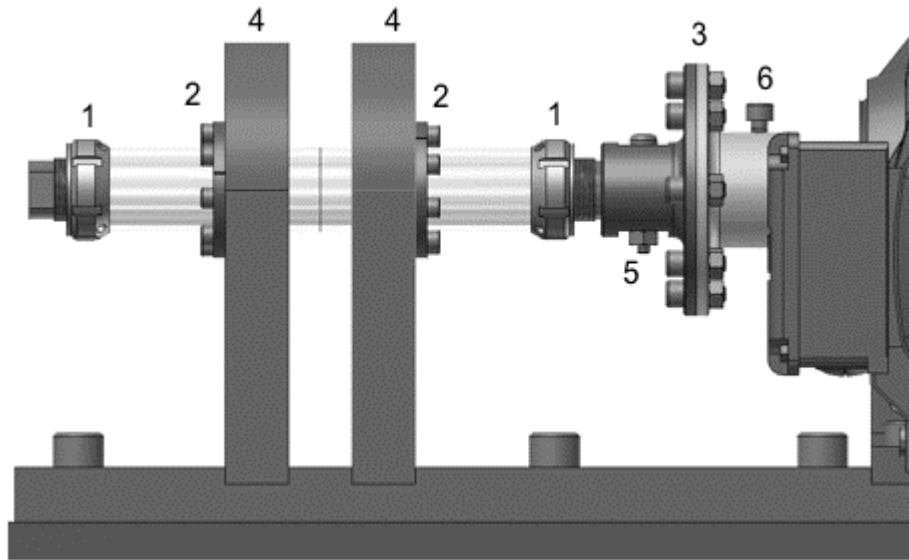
Schematic diagram showing the various components in the tube clamping System.
